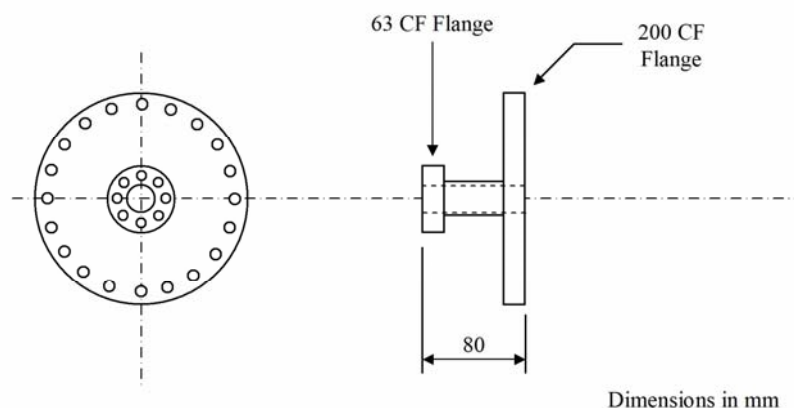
Schematic Drawing of the New Adaptor Flange
